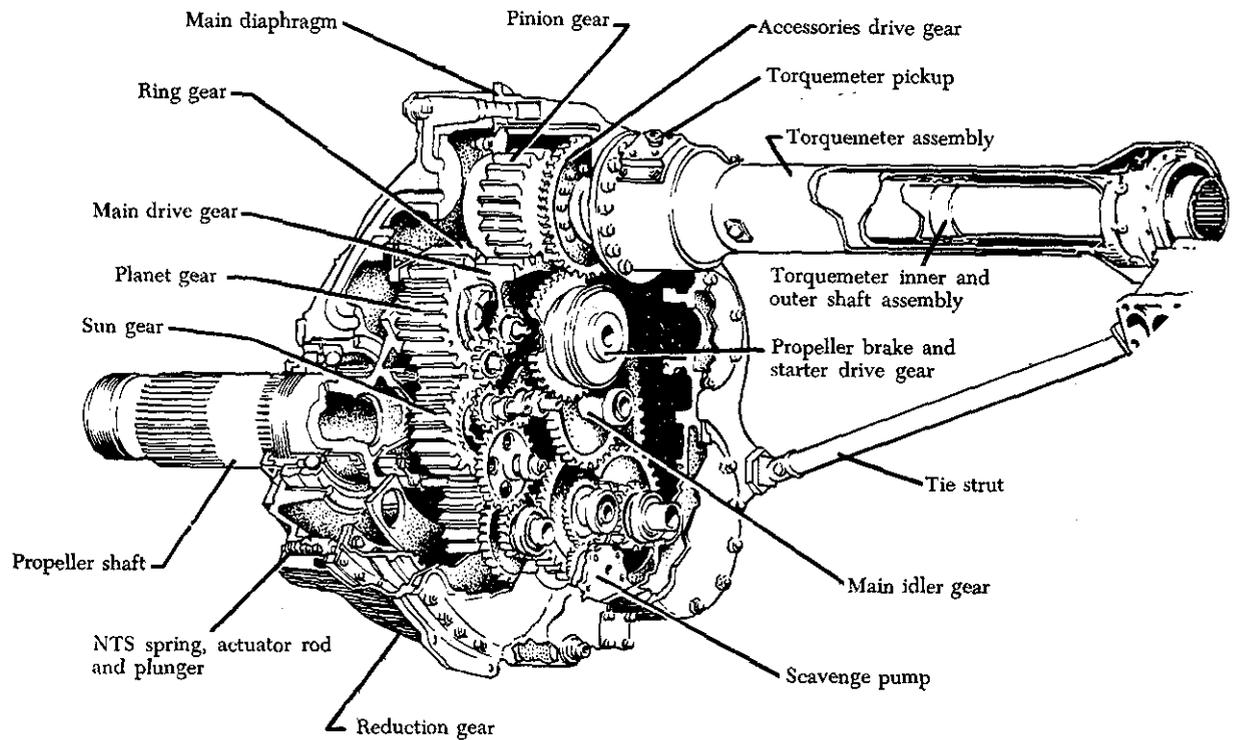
Reduction gear and torquemeter assemblies.
